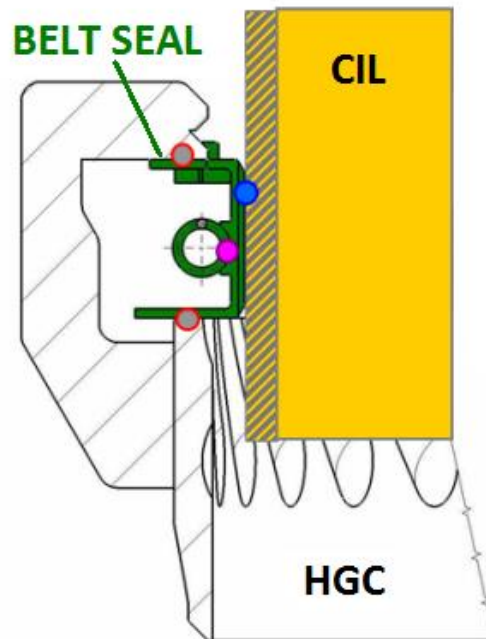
Interface of: Inner liner – Hot gas casing, sealed with Belt Seal
